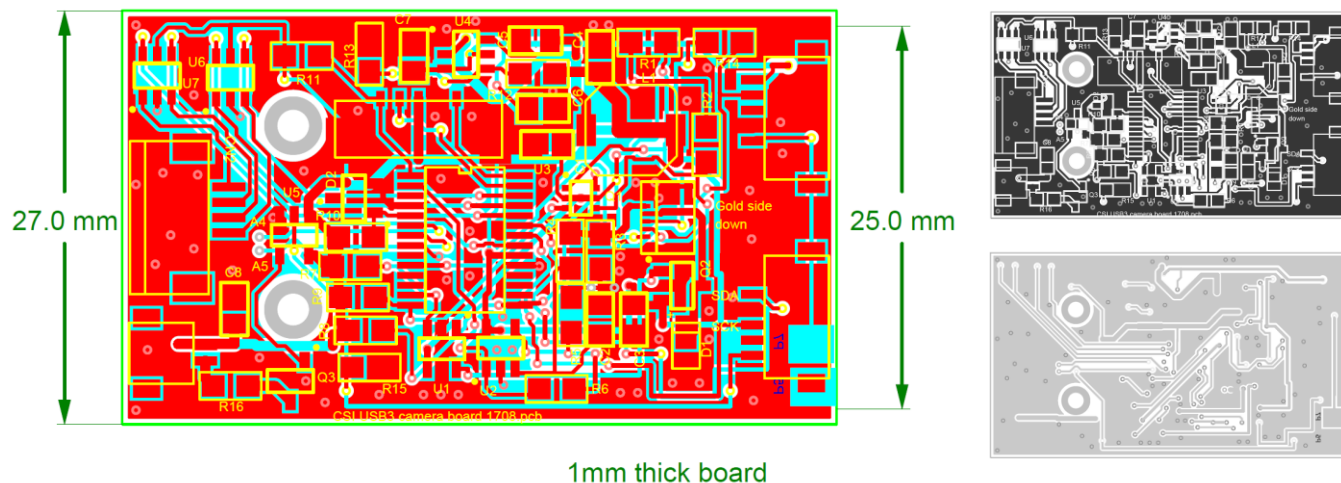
Printed circuit board layouts of the lens driver board. The complete design is shown on the left (2x magnification, when printed on A4 paper) with the top (top right hand side of the figure) and bottom (bottom right hand side of the figure) layers shown in real size on right.
